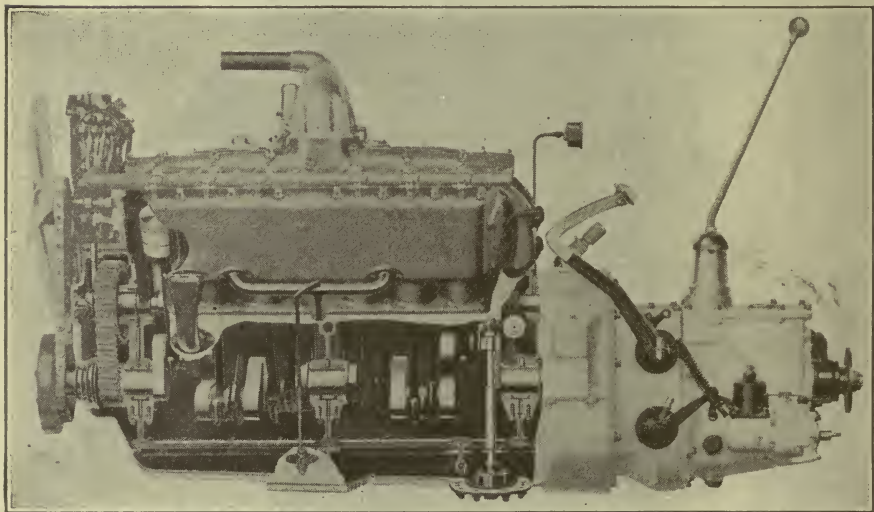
Packard Engine. Note method of assembling rod bearings.
